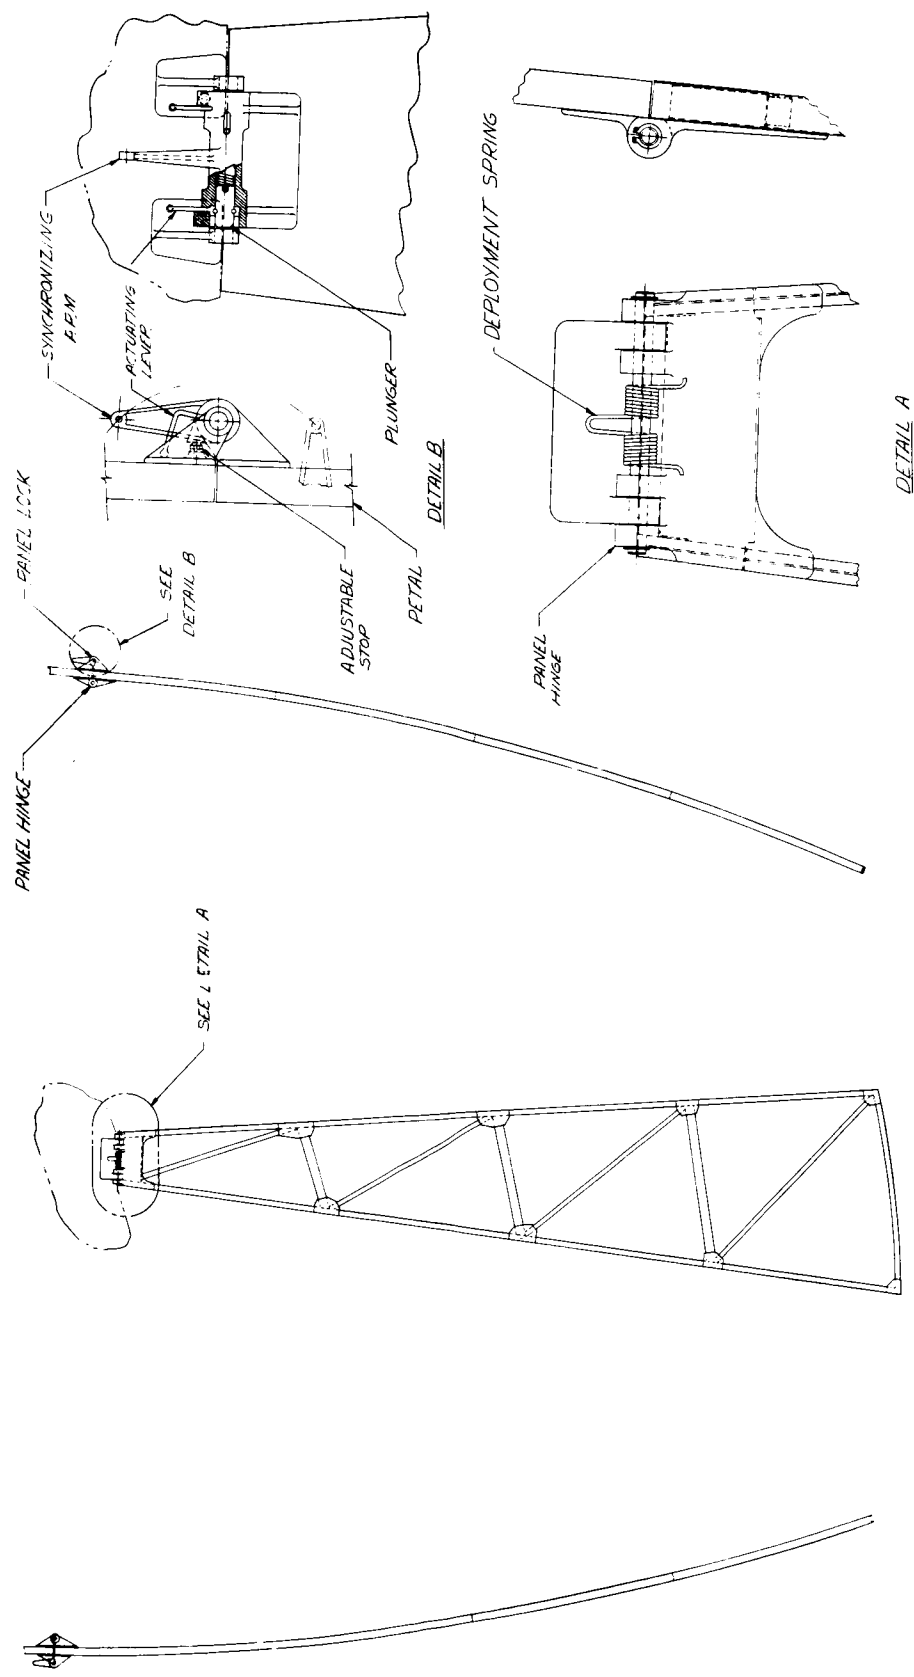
Petal Structure Assembly and Hinge Details
